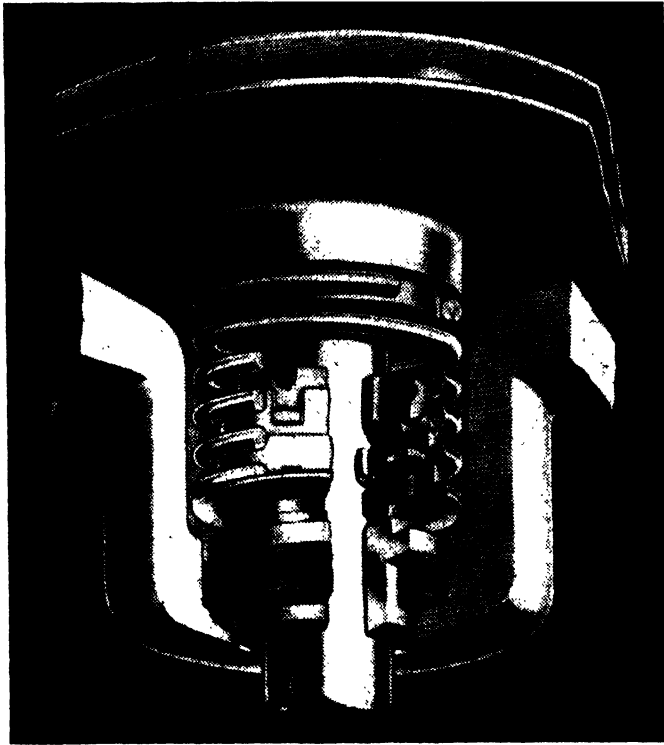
Crane bellow seal. (*Crane Packing Co., Chicago, Ill.*)
